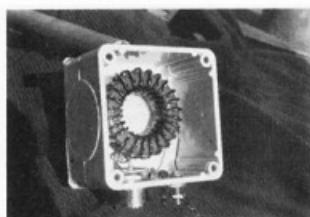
Method used to mount matching transformer in Clipsal 265/3 box.
